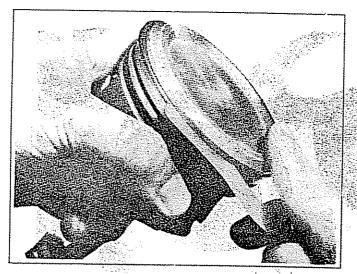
A2-51-Measuring Ring Groove Clearance and J-22250 (4-1/4") are available for this purpose.
